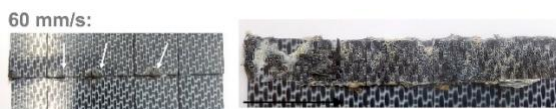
Fracture surfaces of CF/PPS laminates. Welding force of 500 N and a peak-to-peak amplitude of $49.5 \mu\text{m}$. On the left the top surface of the laminates after welding is shown, white arrows indicate surface damage due to overheating. On the right the fracture surface of the weld is shown after mechanical testing. Adapted from [12]
